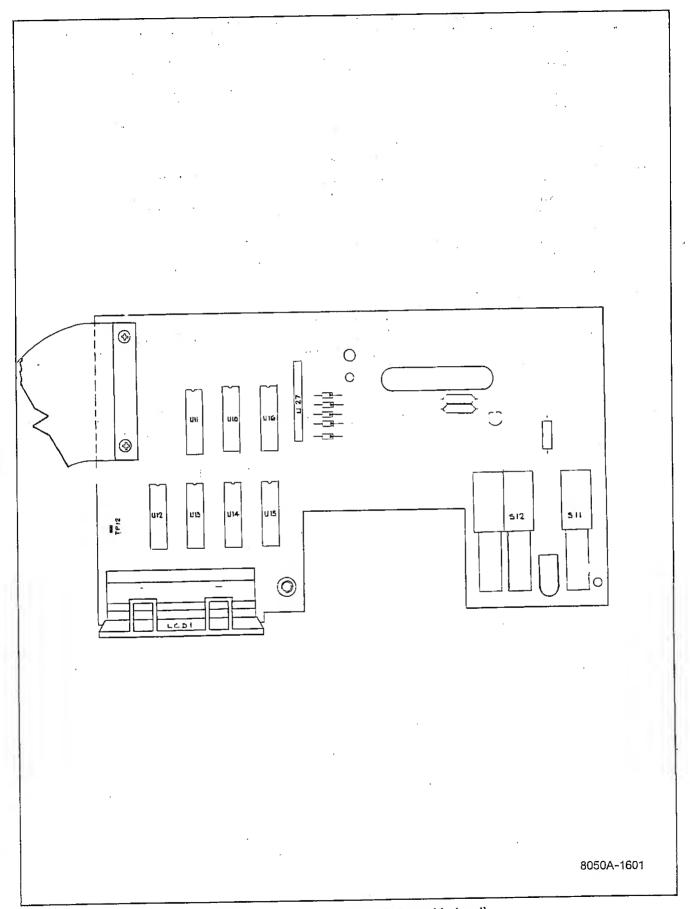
8050A A1 Main PCB Assembly (cont)
